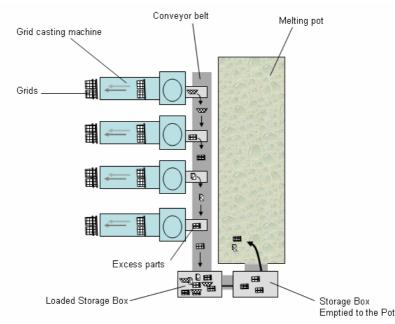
Top View of Grid Casting Department with Conveyor Belt
